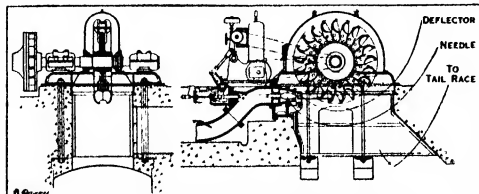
PELTON WHEEL WITH SINGLE NOZZLE
